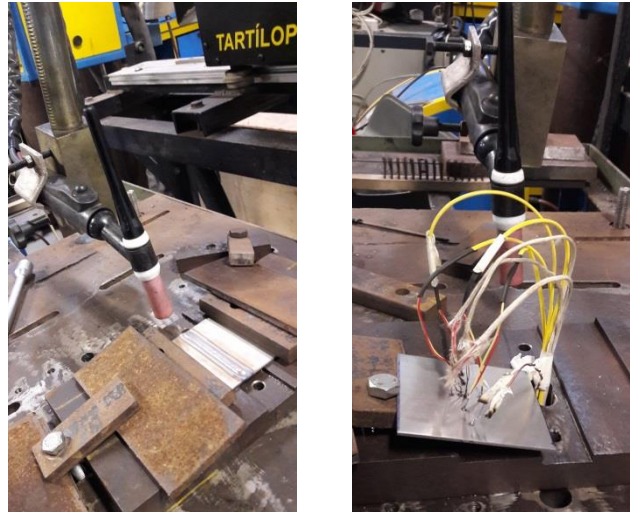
Welding arrangement for the duplex stainless steel UNS S32304 thin plates.
